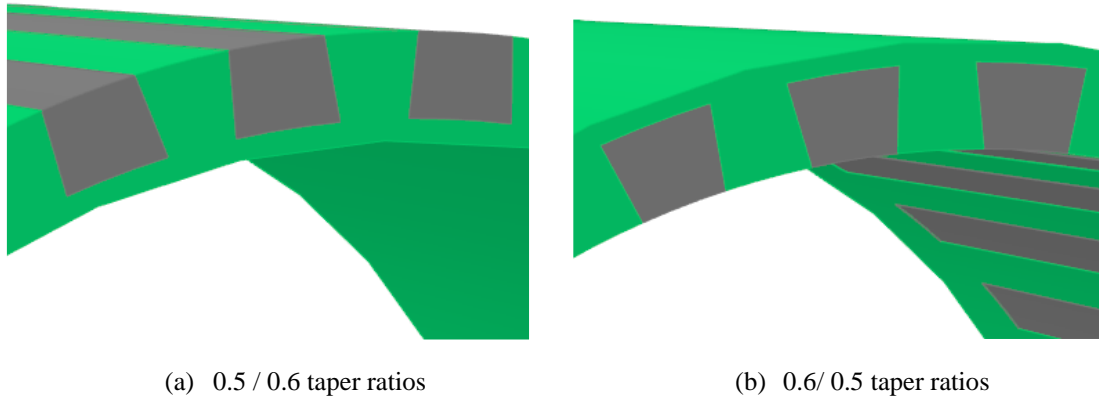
PPR cross-section (a) outer (b) inner pole piece taper
